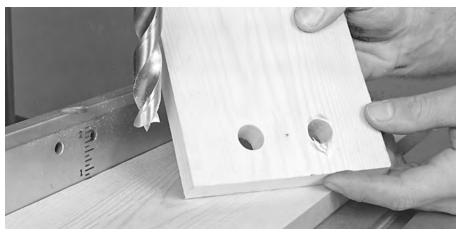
When a bit exits a hole, you may get some tear-out, as shown on the right. To avoid this, drill partially through the board until just the pilot of the bit comes out the other side, as shown in the center. Then turn the workpiece over and drill from the other side. The hole will be clean, as shown on the left.
